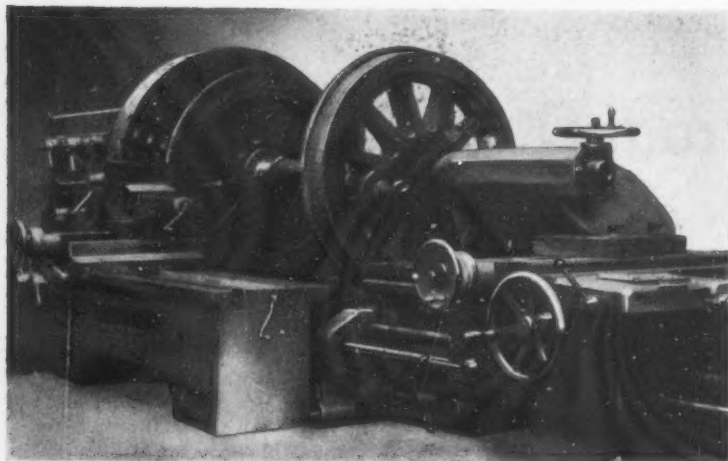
Set-up for Machining Railway Wheels with the Auxiliary Bed on the Granor Lathe
